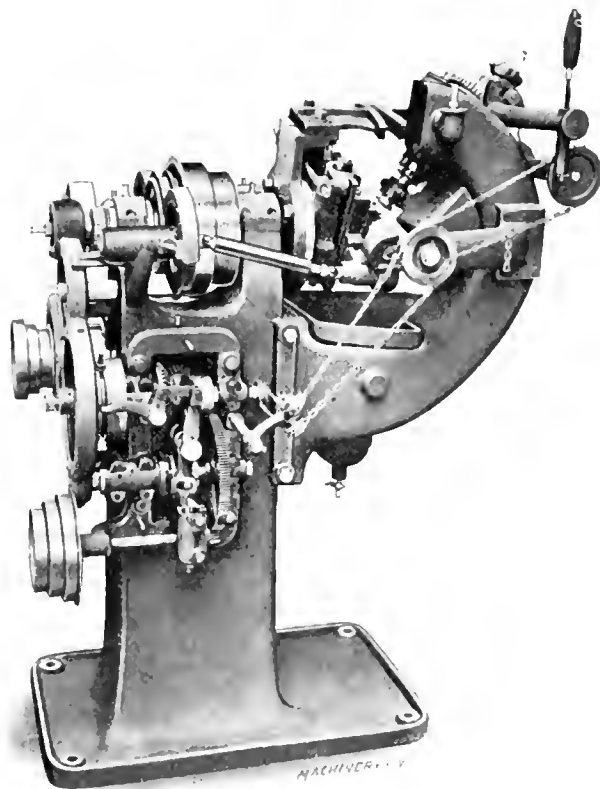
The Warren Bevel Gear Generating Machine as built by Ludwig Loewe & Co., Berlin.
